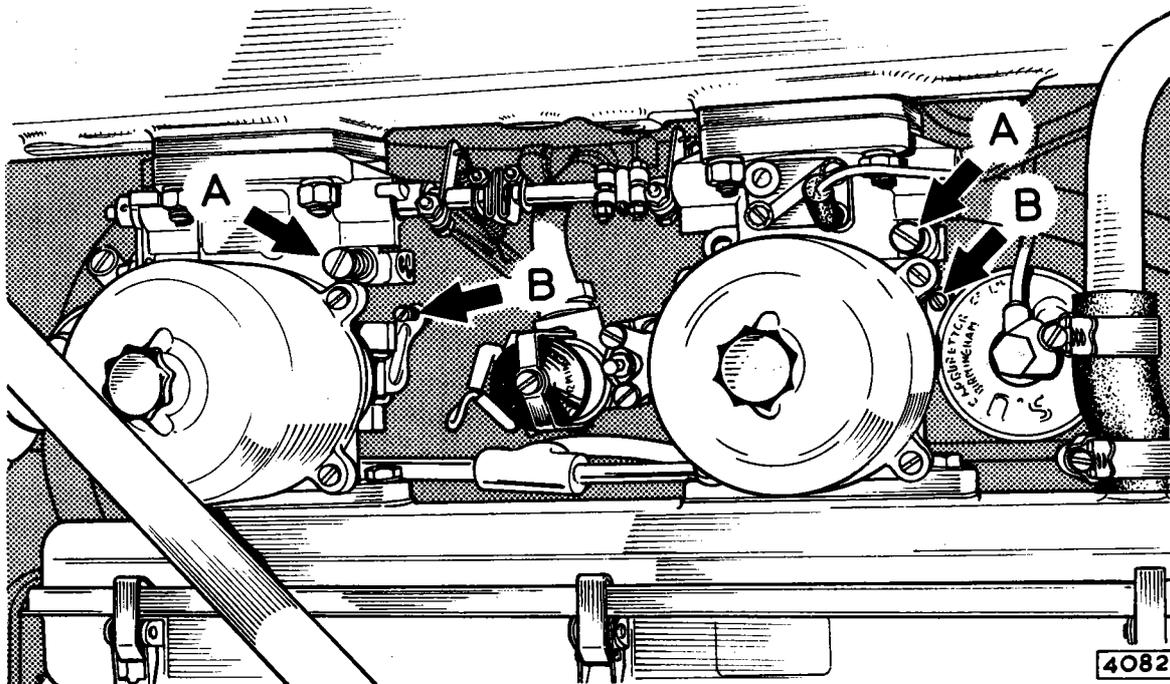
Carburetter tuning—"A"—Slow running screw, "B"—Mixture adjusting screw
